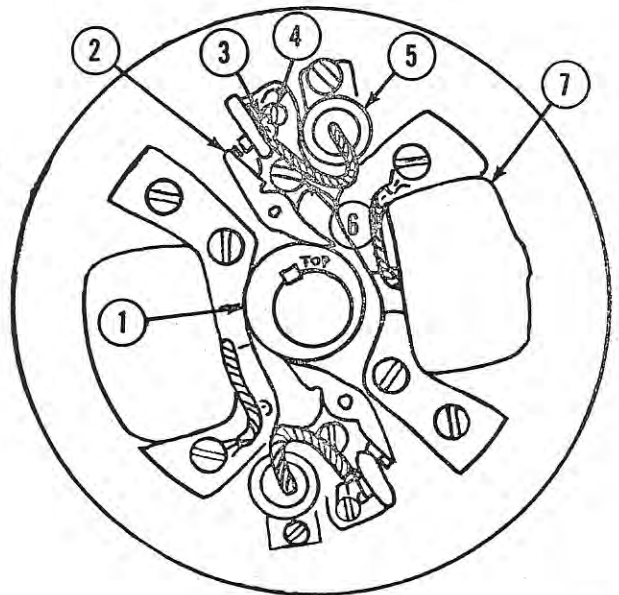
Magneto assembly with flywheel removed. Unit contains a separate coil, points and condenser for each cylinder.
